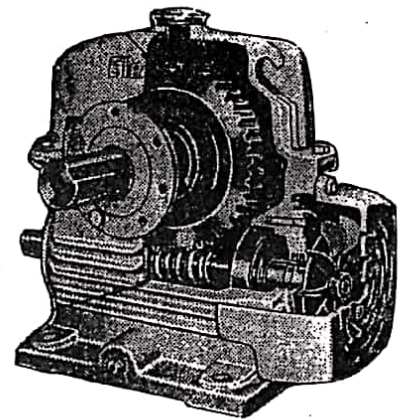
A worm and worm wheel in a reduction gear assembly.
